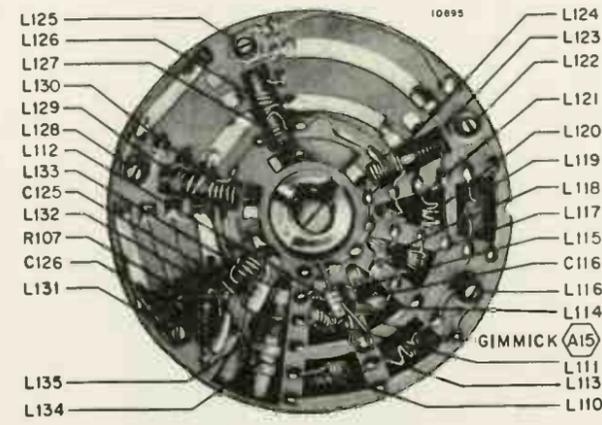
View of Oscillator-Mixer Rotor Disc in VHF Tuners 94E144-9, -22, -27 and -30.
